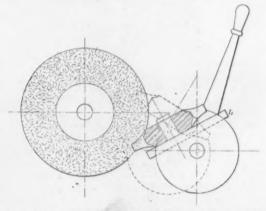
Showing the Manner of Grinding the Corners Between Gear Cutter Teeth.
